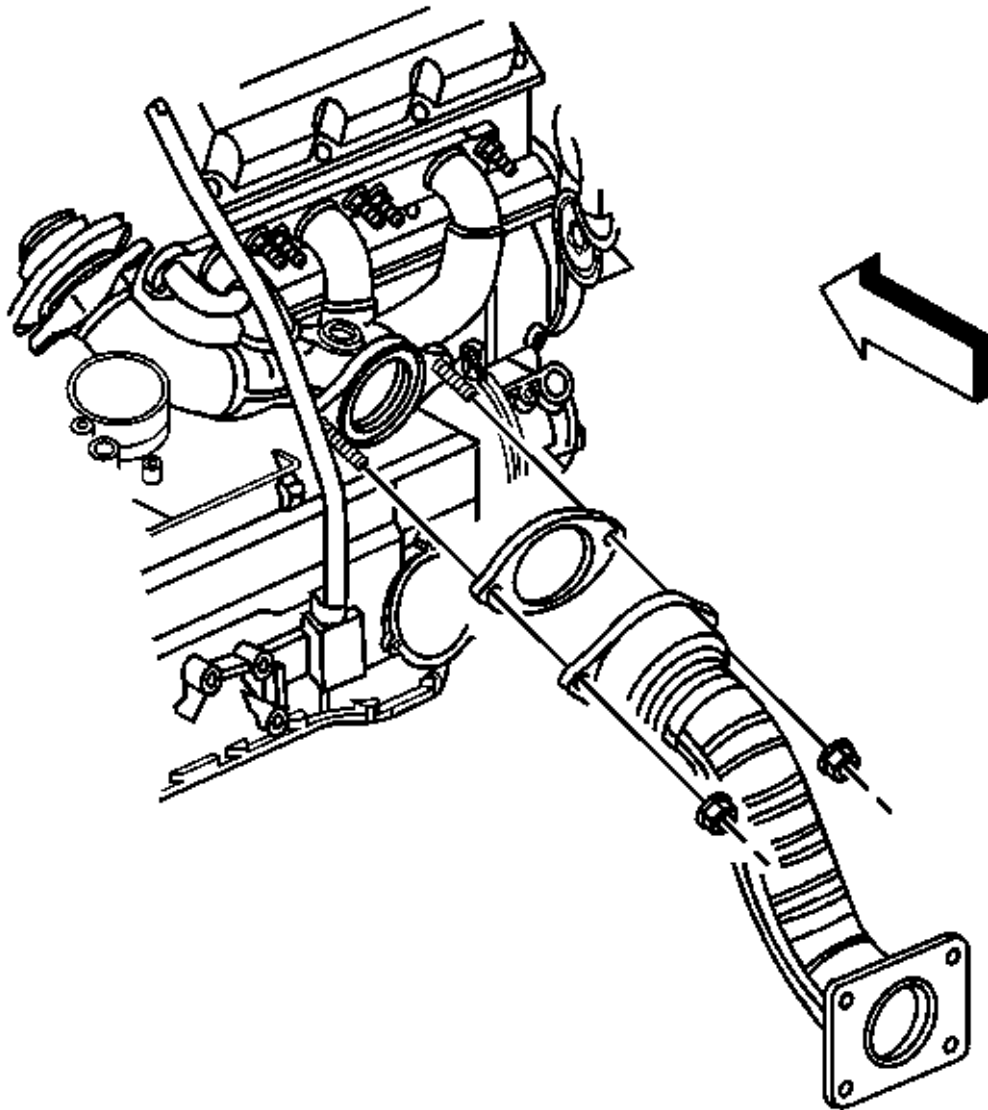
View of Exhaust Manifold Pipe, Studs, & Bolts
